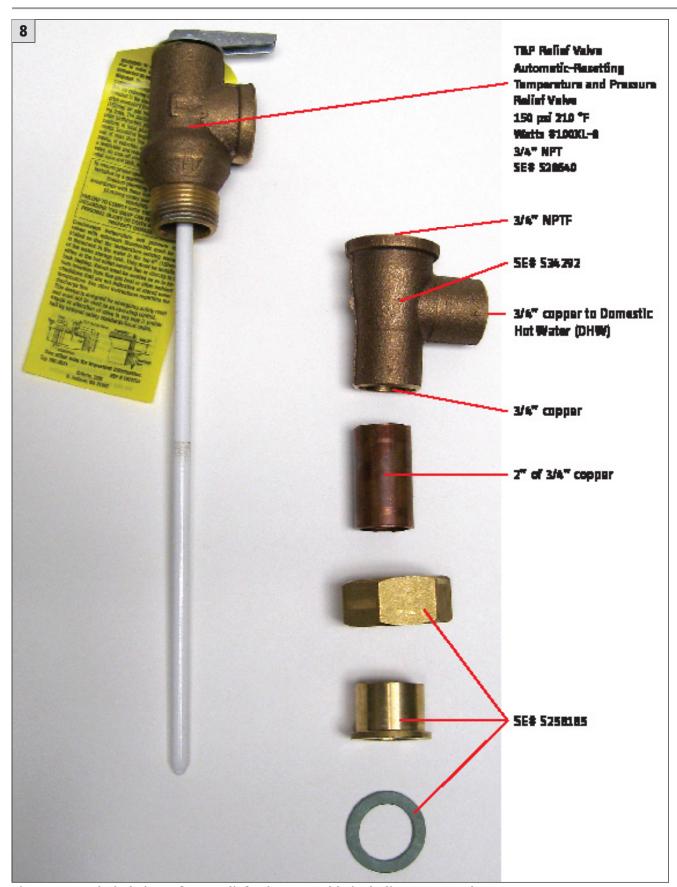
Exploded view of T&P relief valve assembly including part numbers
